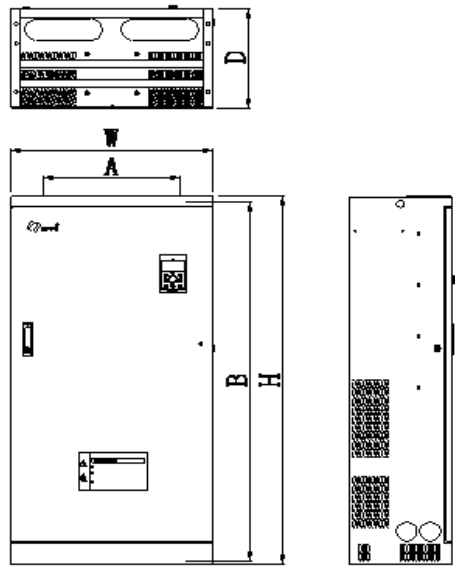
160~400KW VFD External Dimensions and Installation Dimensions Diagram
